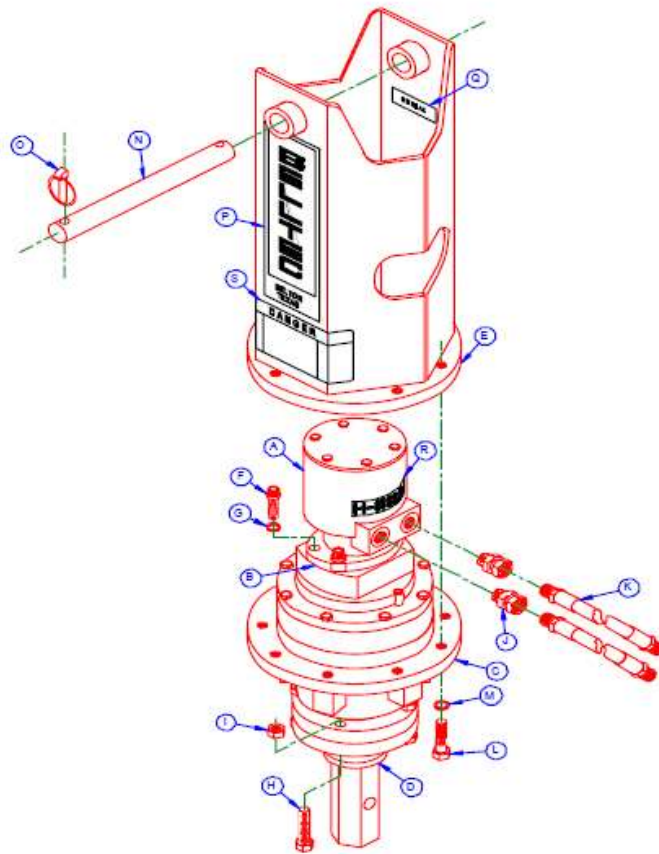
Detail and assembly instructions of a Belltec hydraulic auger drive
